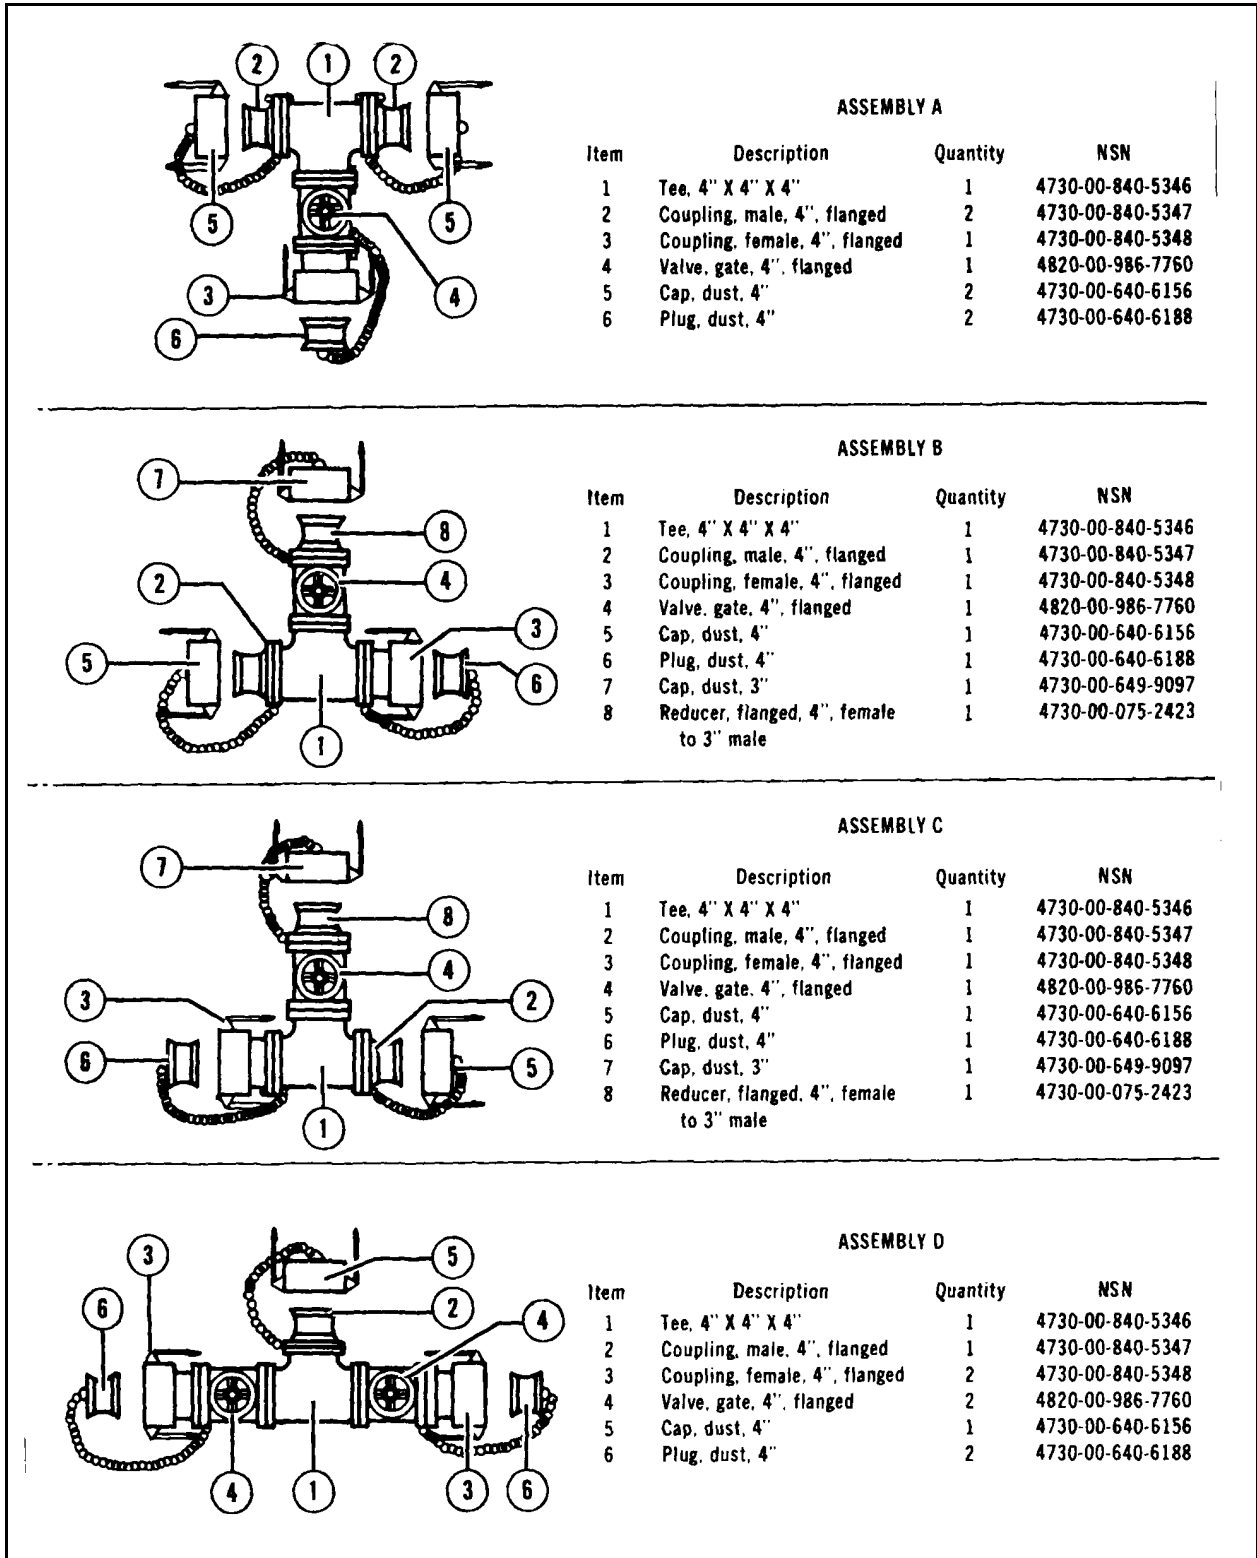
Principal valves and fitting assemblies of temporary refueling systems
